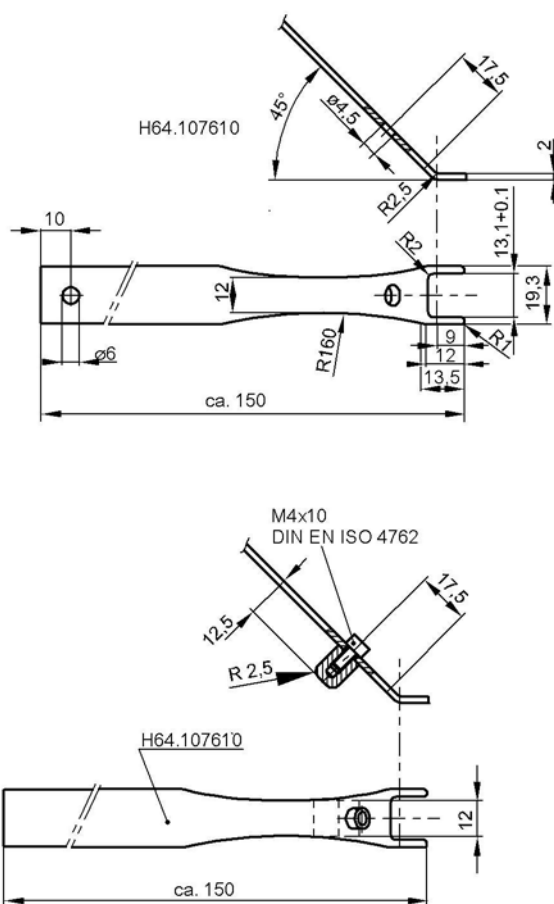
Tool for loosening the cable plugs from the solenoid coils
